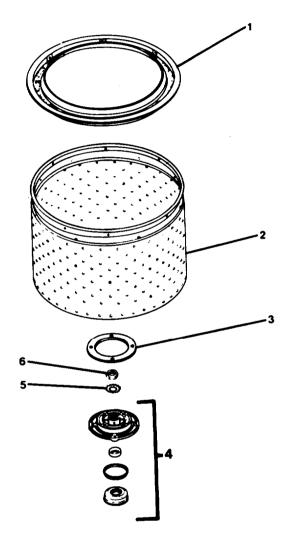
Washer Machine Filter. Washtub. and Hub Croup.
